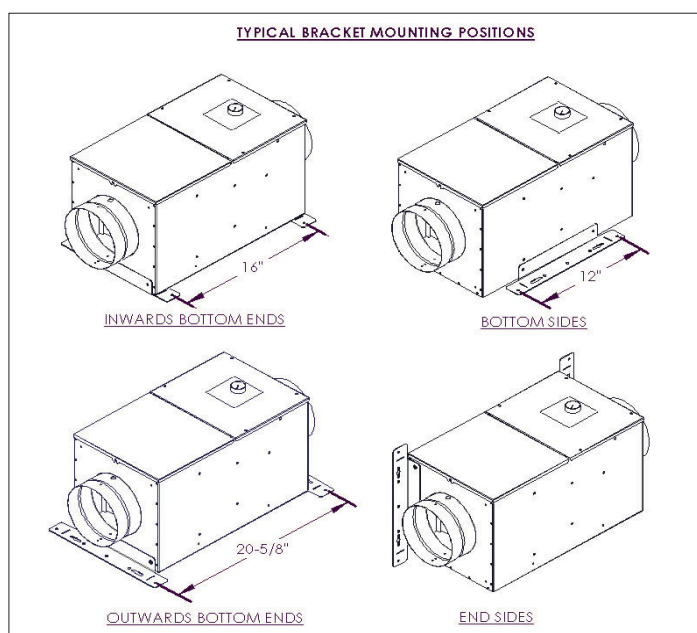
TYPICAL BRACKET MOUNTING POSITIONS
